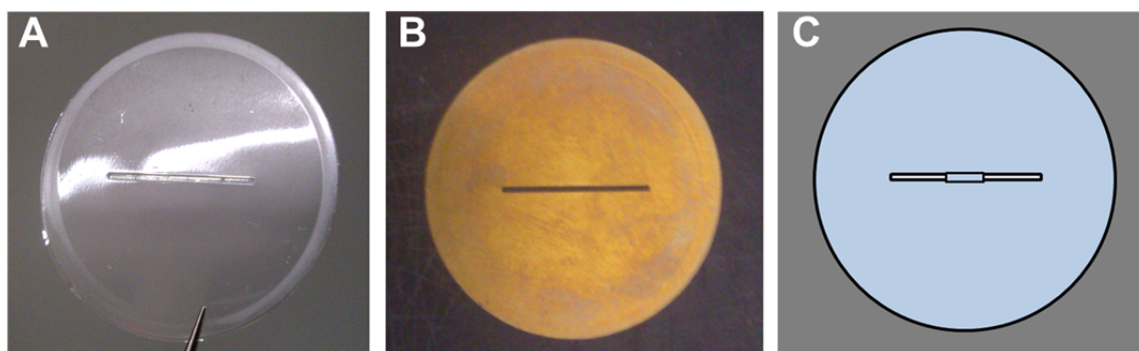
A) Photograph of a patterned PC film after thermoforming. B) Photograph of the brass mold employed for SMART. C) Schematic depiction of the homemade shadow mask employed for irradiation, consisting of the brass mold and a narrow strip of aluminum foil placed in the middle of the slit. Reproduced with permission from Wiley, 2015 (DOI: 10.1002/adma.201500426).
